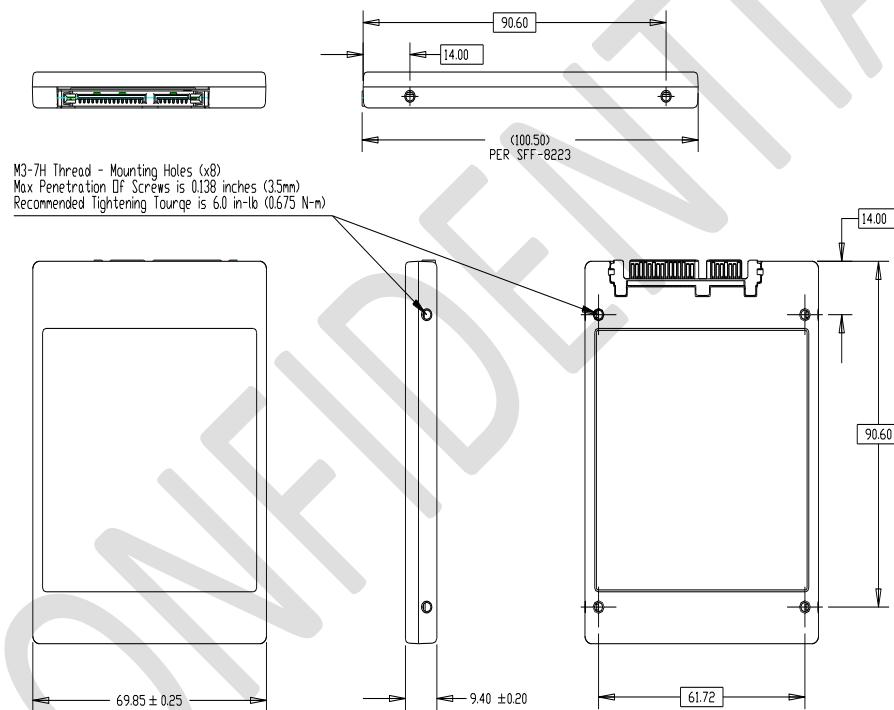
Drawing - 2.5" 9.5mm Form Factor
